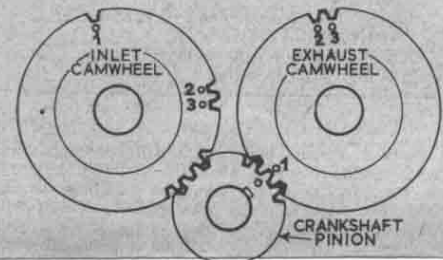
Setting valve timing using marks on camwheels and crankshaft pinion.
